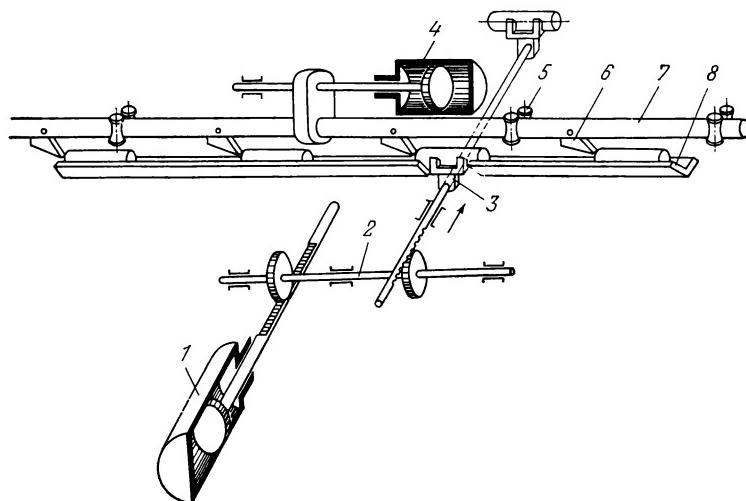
Principle of the handling system of the transfer machine for producing electric motor shafts:
